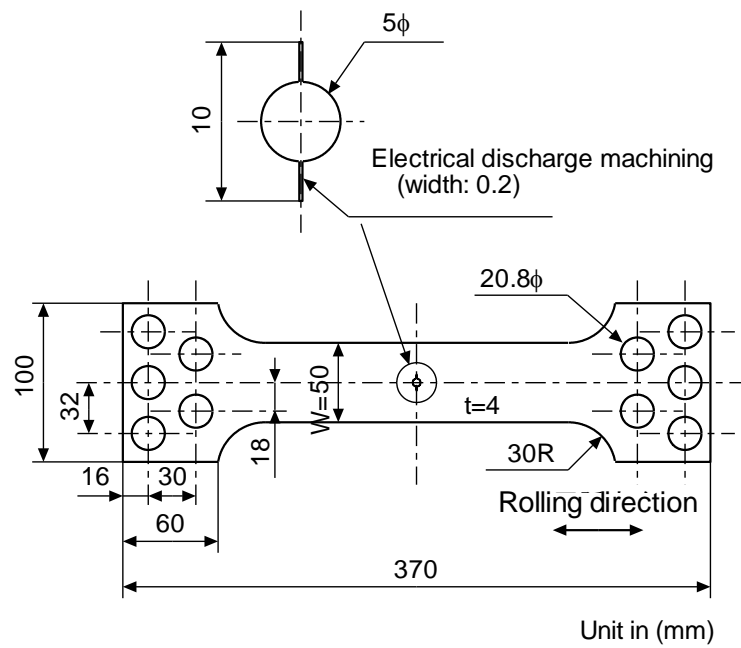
Centre cracked tensile (CCT) specimen used in the fatigue crack propagation tests.
